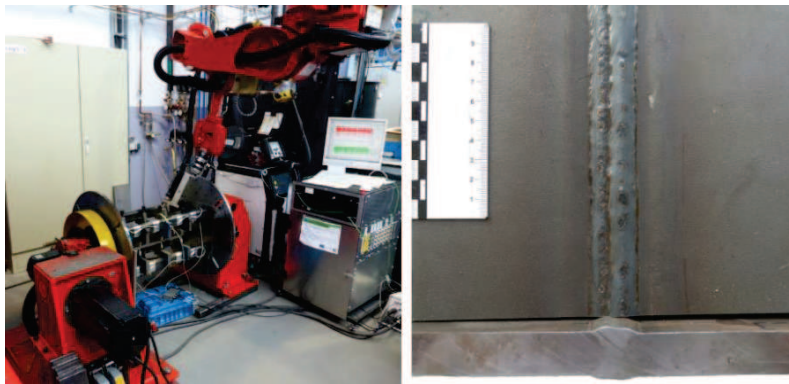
Welding test stand (left) and plate with butt-weld (right).
